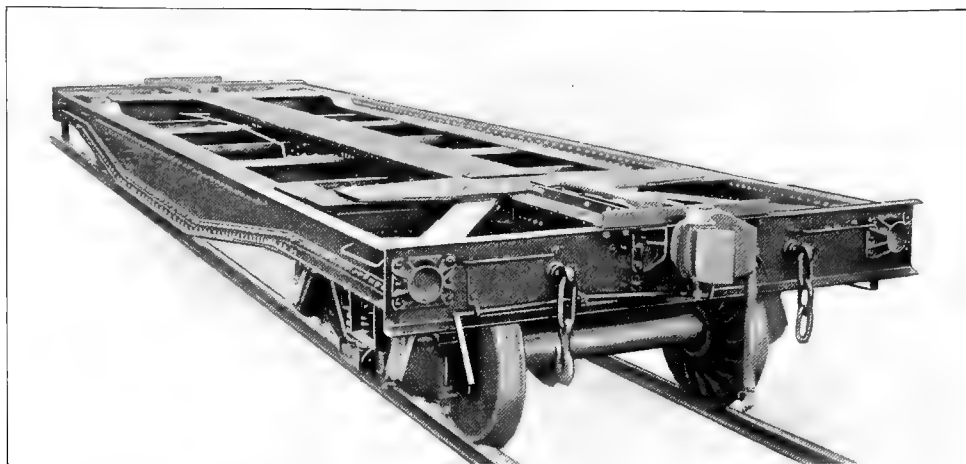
Steel Frame for Erie Railroad 75-Ton Capacity Flat Car. Builder, American Car & Foundry Company.
